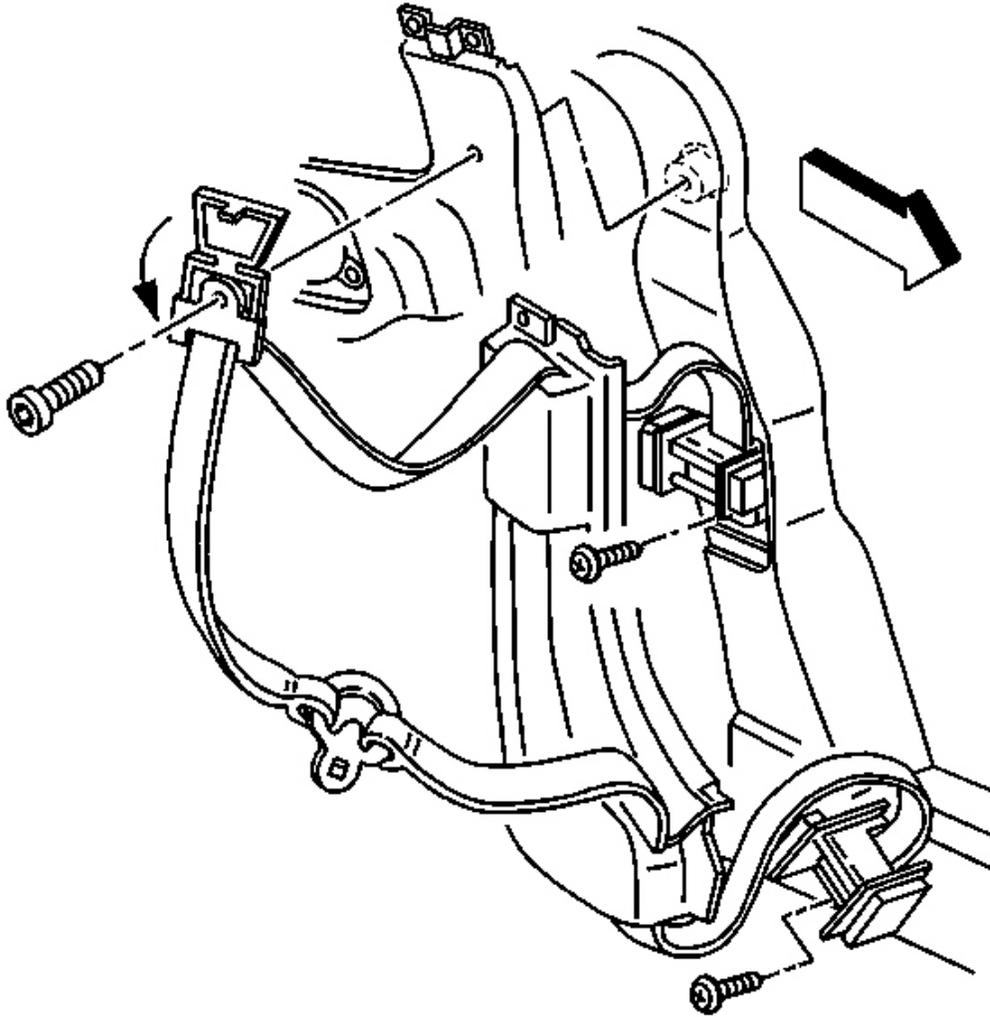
Upper Guide, Bolt & Seat Belt Retractor
